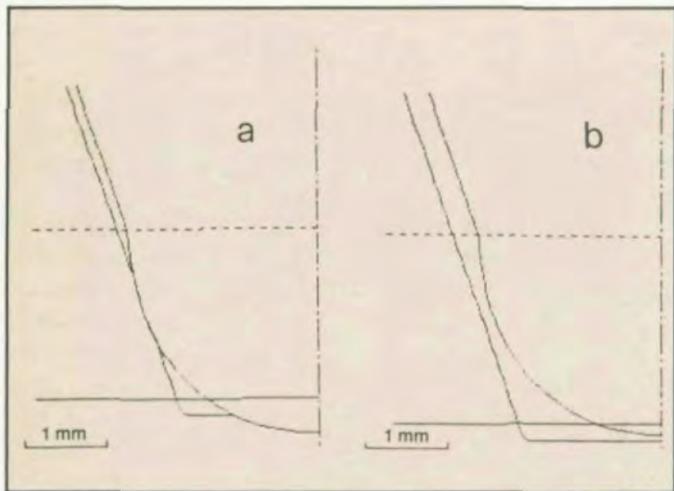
20° grinding of a gear similar to Fig. 7b: (a) undeformed; (b) badly deformed after heat treatment.
